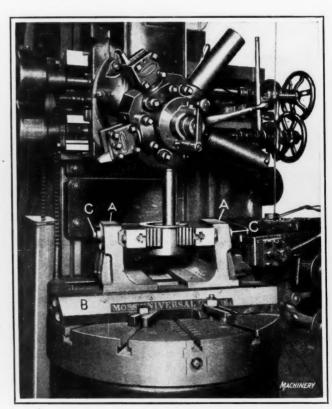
Application of a Universal Chuck on a Vertical Turret Lathe that bores Various Sizes of Bearing Brasses
